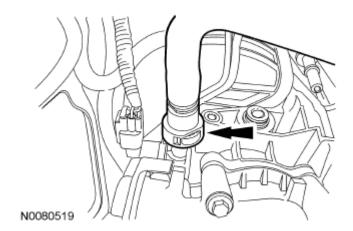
Locating Fuel Vapor Tube Retainer Courtesy of FORD MOTOR CO.
